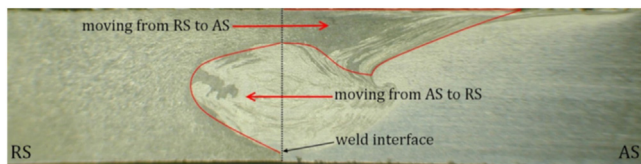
Cross-sectional view of the weld zone of the dissimilar AA6061-AA7075 joint friction stir welded while the low strength AA6061 Al-alloy is on the advancing side, showing that the mixing zone is mainly composed of AA6061 alloy [48].
